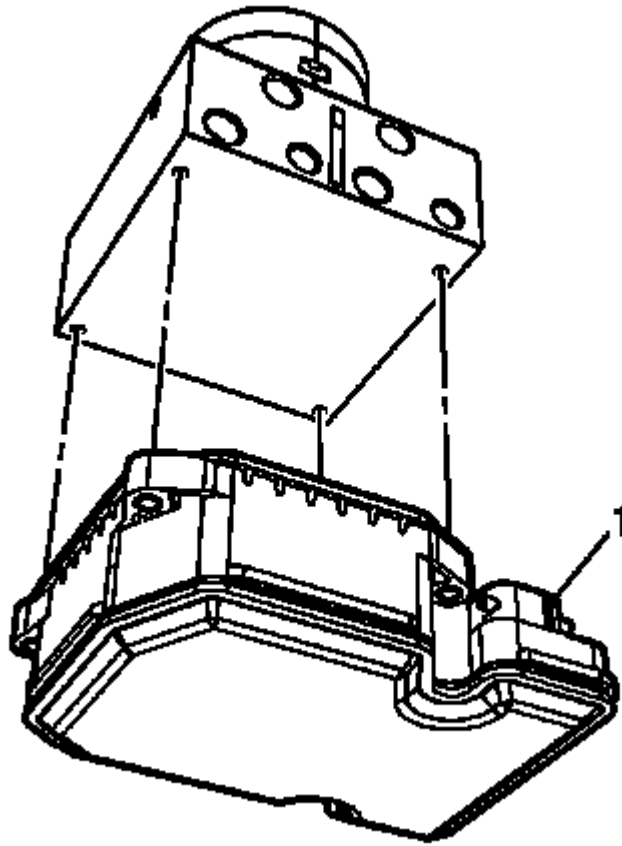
EBCM And Brake Pressure Modulator Valve (BPMV)
